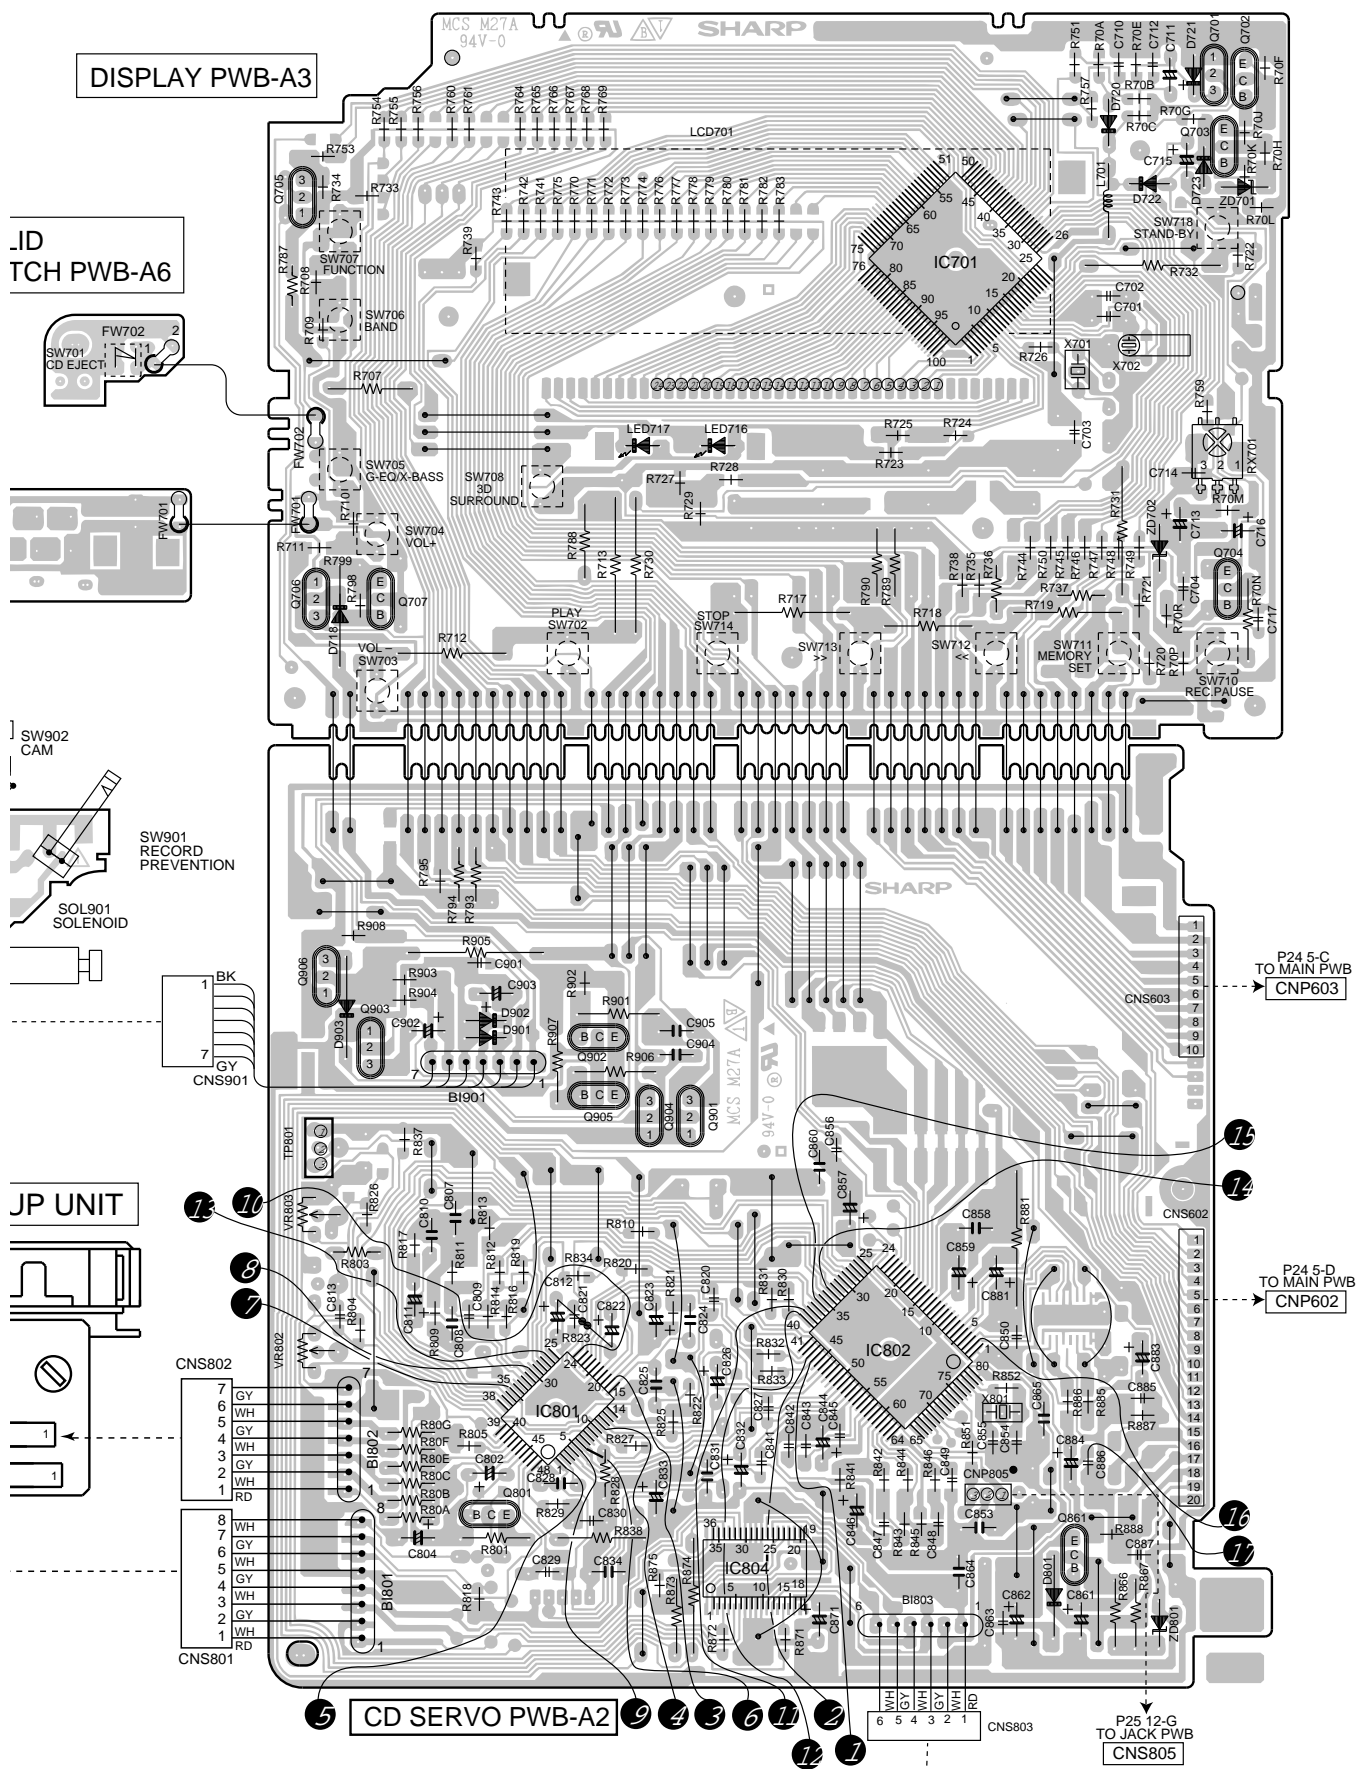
WIRING SIDE OF P.W.BOARD (4/4)
